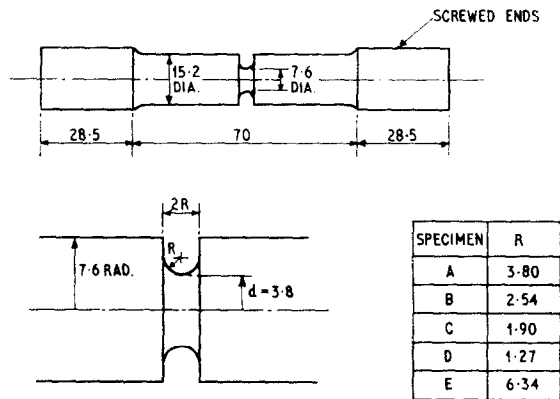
The geometry and dimensions of the notched tensile-specimens. (All specimen dimensions in mm.)
